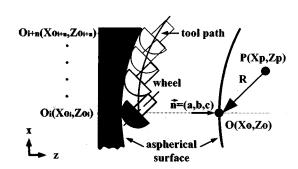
A schematic diagram of wheel movement and tool path in the aspherical grinding
